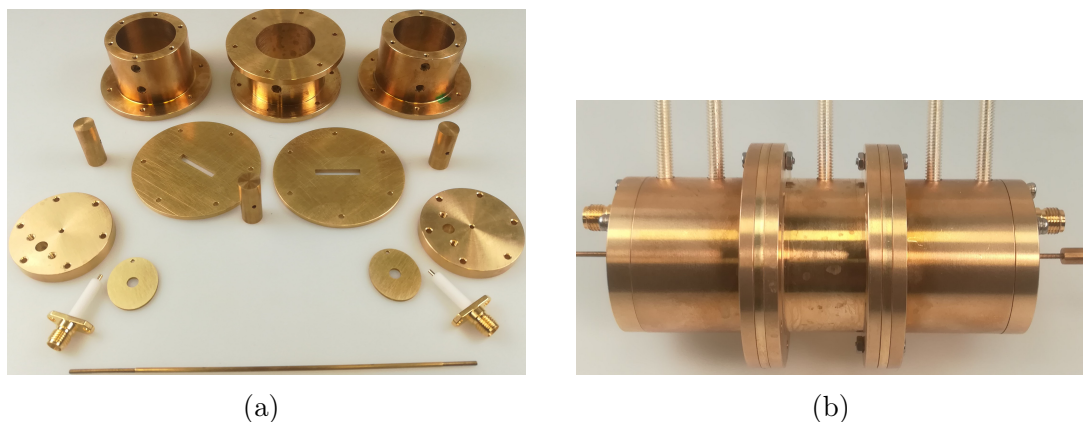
The fabricated 3rd-order multi-octave BW tunable coaxial filter: (a) Disassembled, and (b) final assembled prototype.
